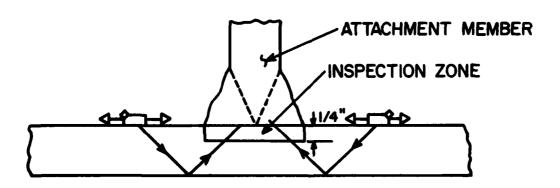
Angle beam inspection technique used in scanning a tee weld.
